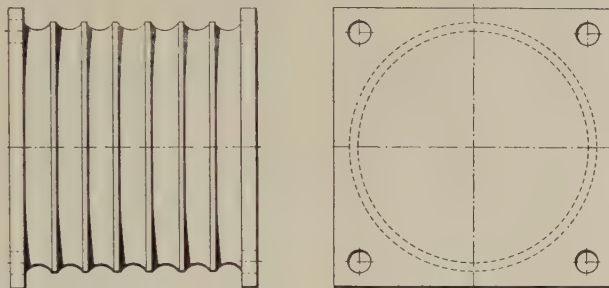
Heavy duty bolster control spring as used in large Diesel-electric locomotives.
